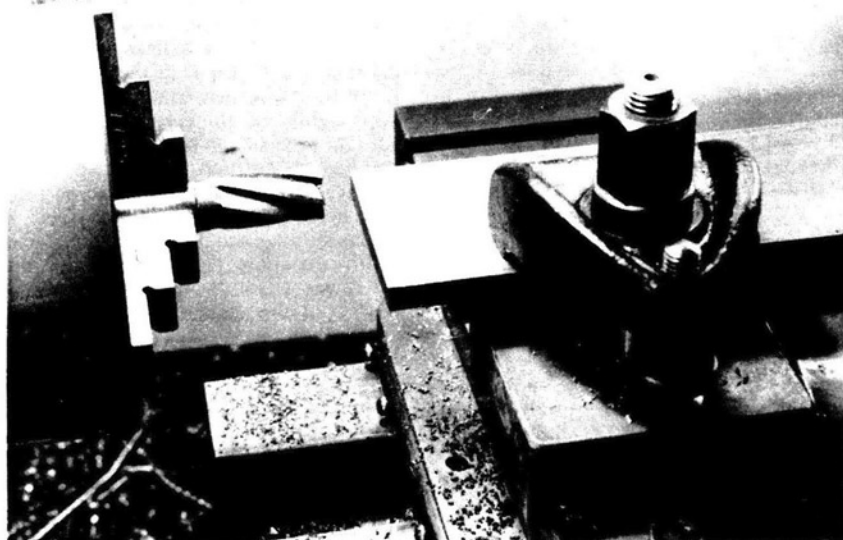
One way of ensuring square ends on the bed plates; end milling in the lathe.
